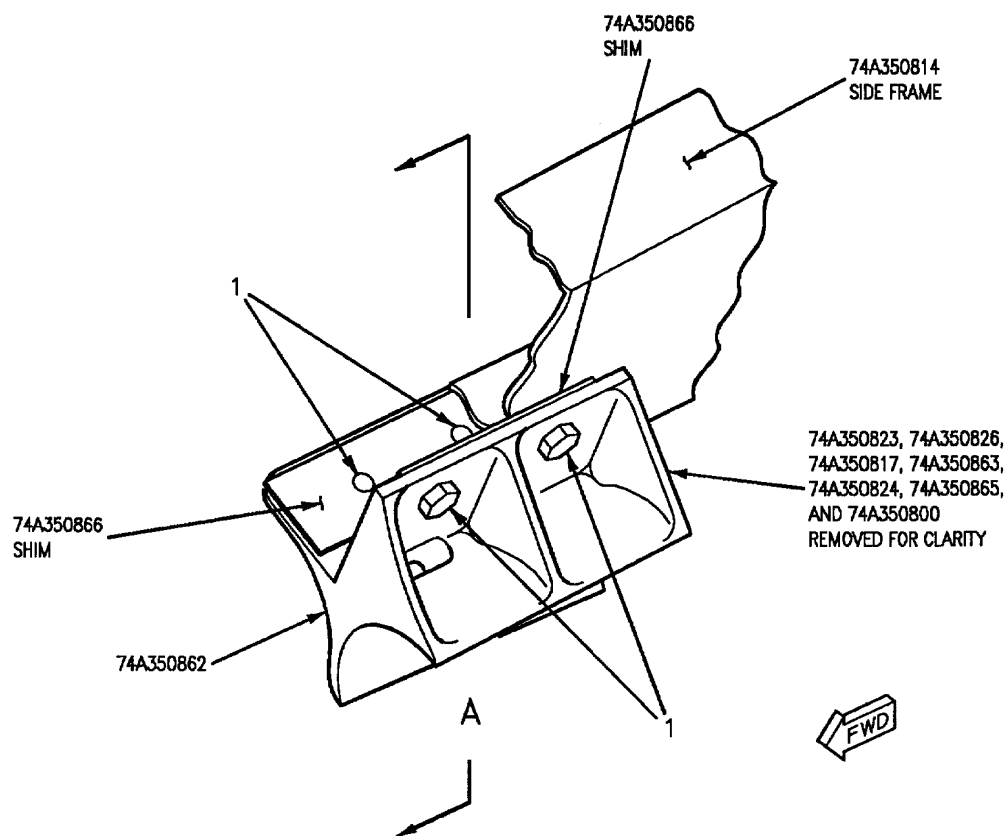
Forward Rocket Motor Support, 74A350862, Fastener Index (Sheet 1)
